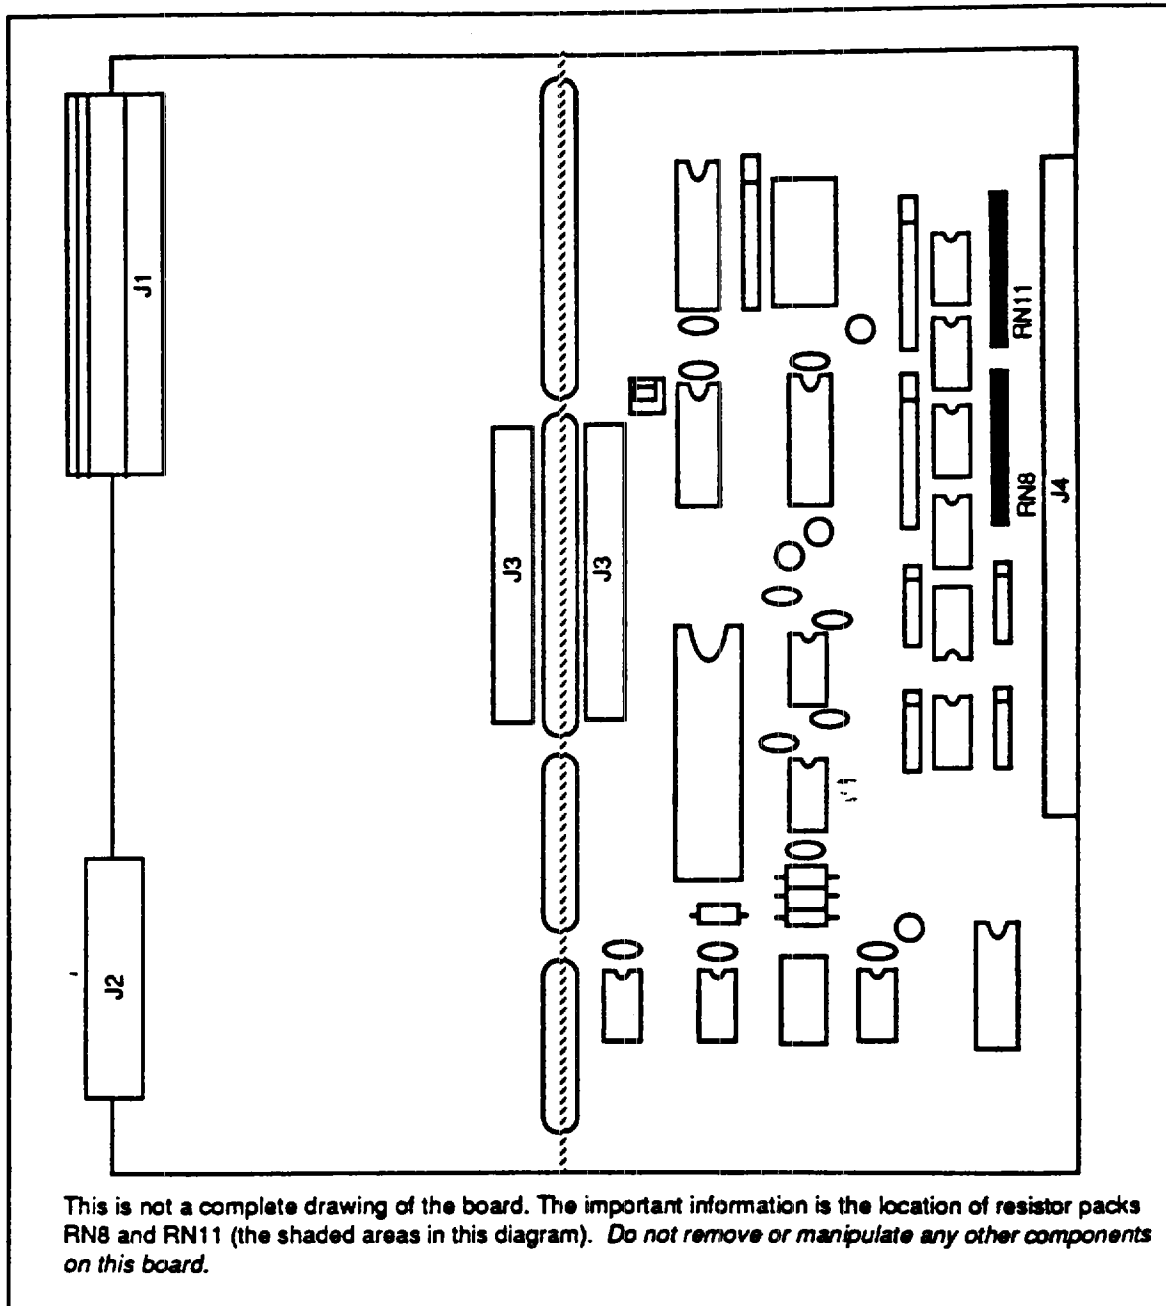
Location of RN8 and RN11 Resistor Packs (Decoder Board)
